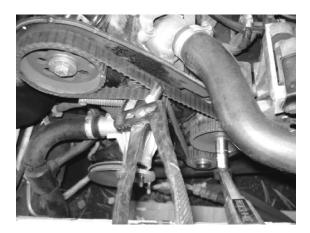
Similarly for the intermediate shaft bolt. Hold the *old* belt tight with large pliers while breaking the 17 mm bolt free.
